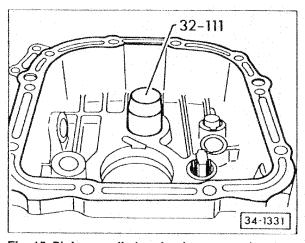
Pinion needle bearing in gear carrier housing, removing
